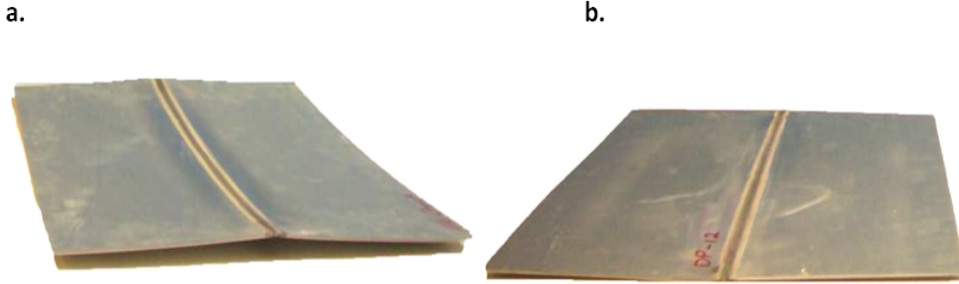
An example of the final out-of-plane deformation after a) conventional welding and b) welding with additional heating compared for DP600 steel, Case II-B.
